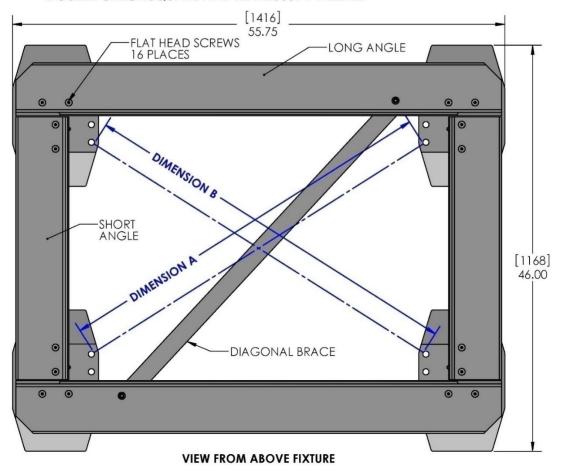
NOTICE FOR CHECKING SQUARE OF ASSEMBLY
